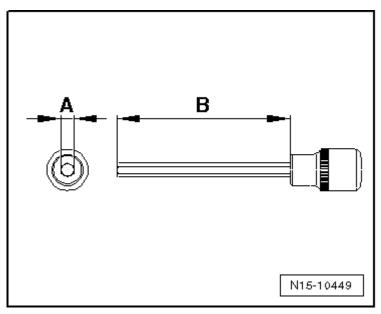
Identifying 6mm Hex Socket -A-, 5cm Long -B-
